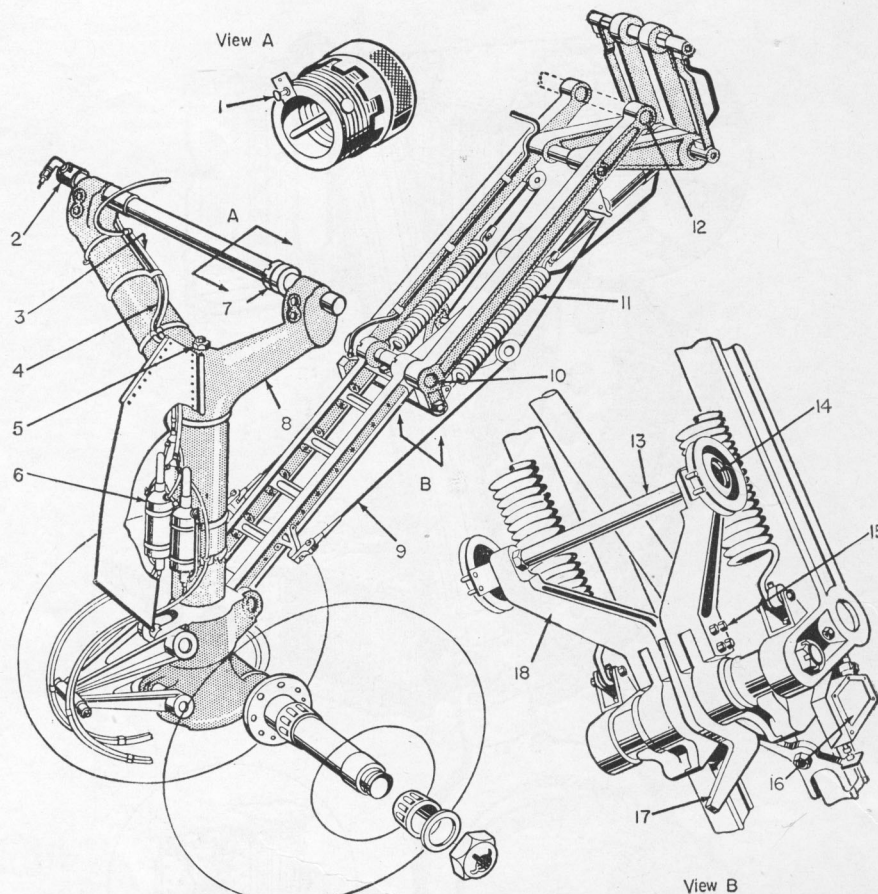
Features of the North Star landing gear include: (1) locking screw; (2) hydraulic brake gland; (3) hydraulic brake line; (4) air brake line; (5) shock-strut air valve; (6) brake lock-out cylinders; (7) collar; (8) shock-strut fork; (9) bungee cables; (10) drag linkage knee; (11) bungee spring; (12) bolt; (13) pulley spacer bar; (14) down-latch pulleys; (15) pulley arm attach bolts; (16) down-latch switch; (17) door operating hook; (18) pulley arms.
